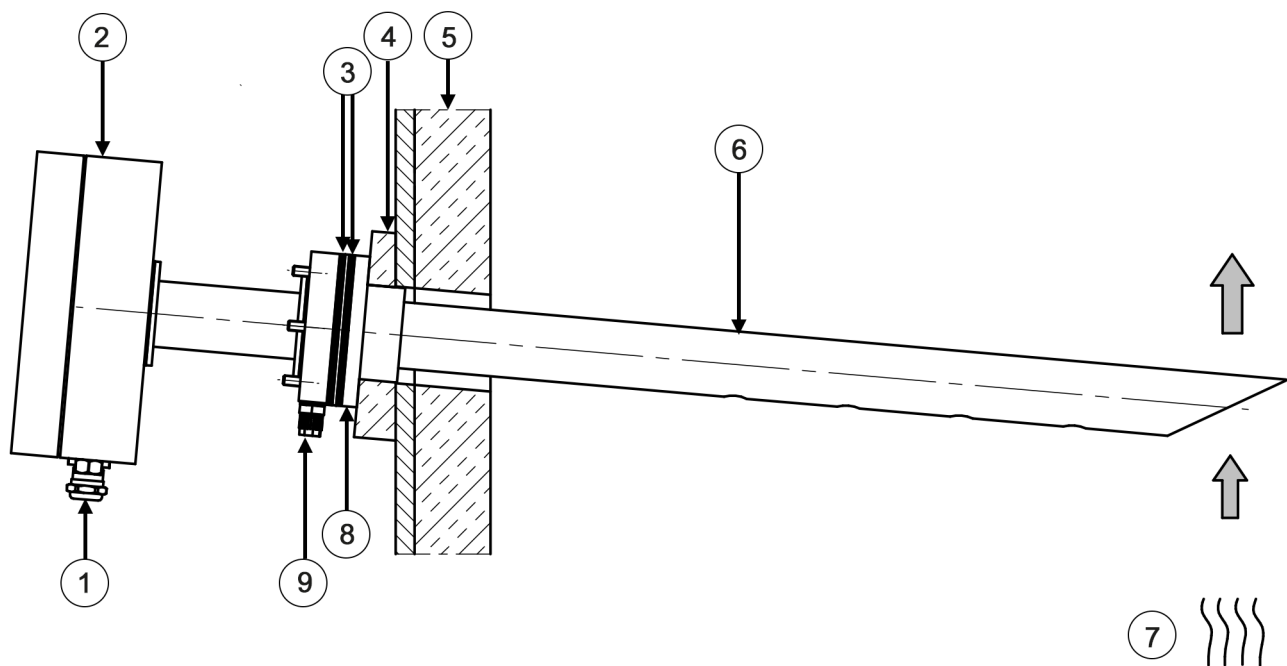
Dimensional drawing Combination Probe KS2DNO_x with GED BASE
